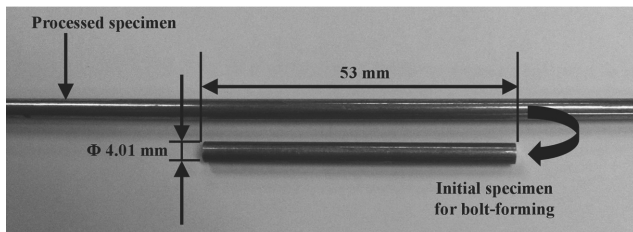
Continuous grain-refined AA6061 wire processed by the two-pass hybrid process and an initial cylindrical specimen for bolt-forming cut from the wire [53]
